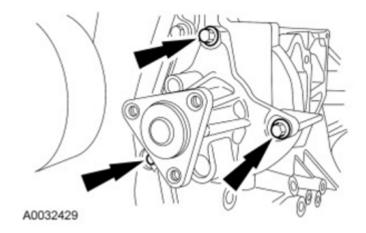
Locating Coolant Pump And Bolts Courtesy of FORD MOTOR CO.
